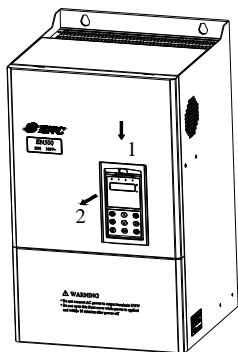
dis-assembly sketch of keypad Fig. 3-4 assembly sketch of keypad
